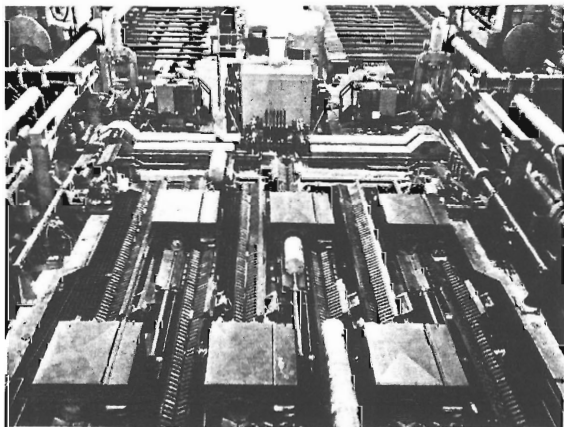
Large 60-cycle aluminum heating installation. Billets up to 26 in. in diameter and 65 in. long can be heated to 850°F. (*Kaiser Aluminum and Chemical Co.*)
